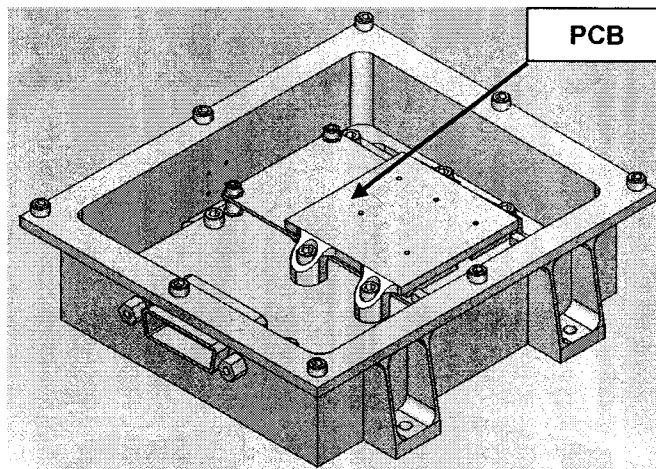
Example of electronic box assembly: CPU Box (Cover not shown)
